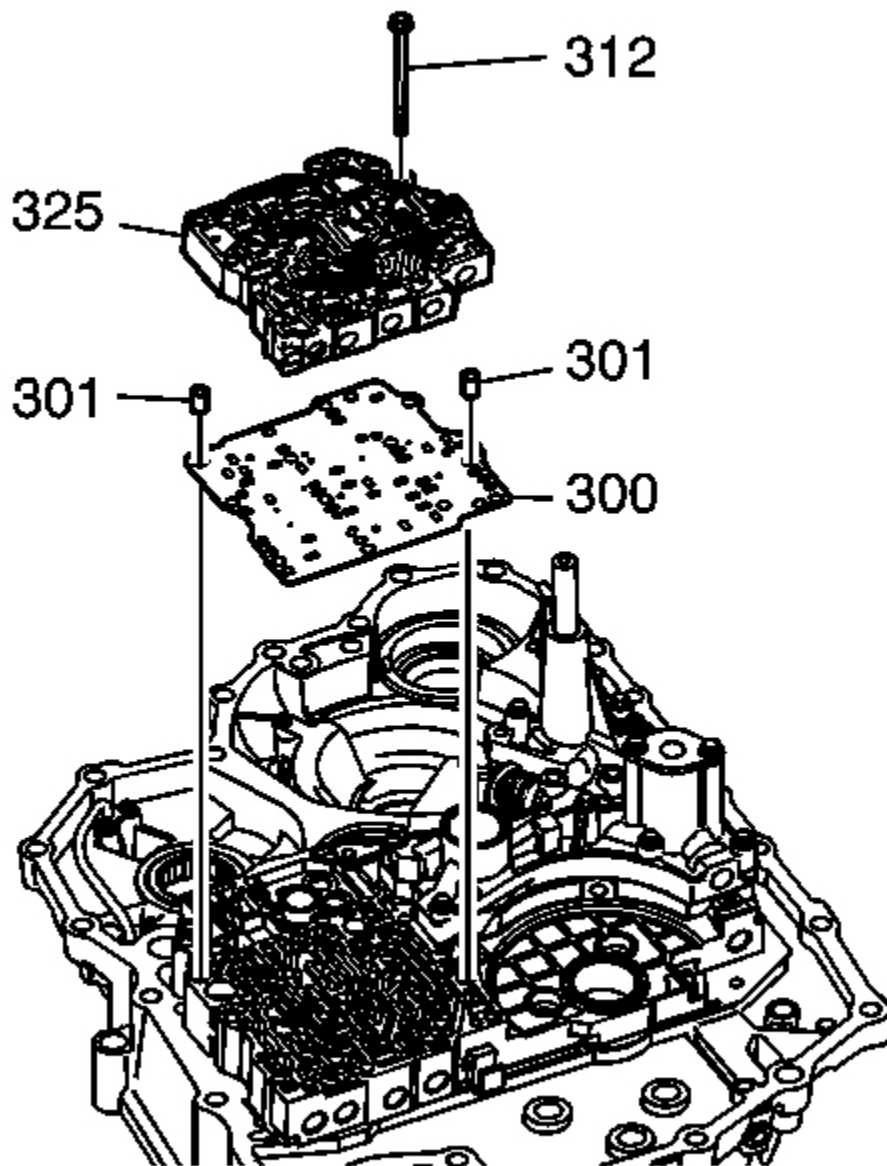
Servo Valve Body, Spacer Plate & Bolts
